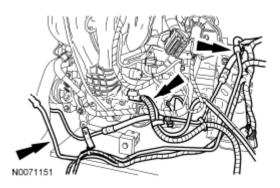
Locating Power Steering Tubes And Wiring Harness Courtesy of FORD MOTOR CO.
